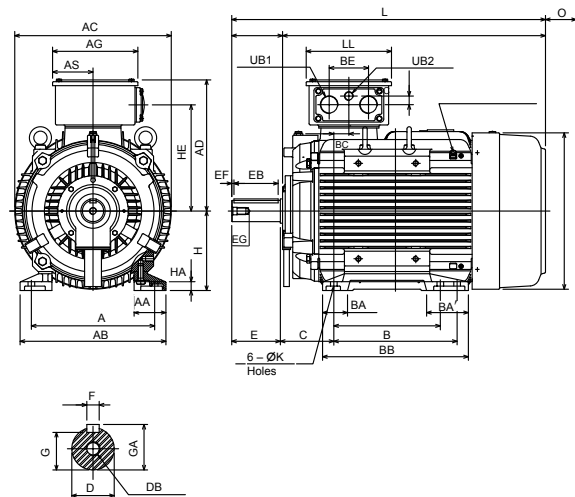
Outline drawing of cast iron design, feet version, mounting B3; frame size 160 – 180
